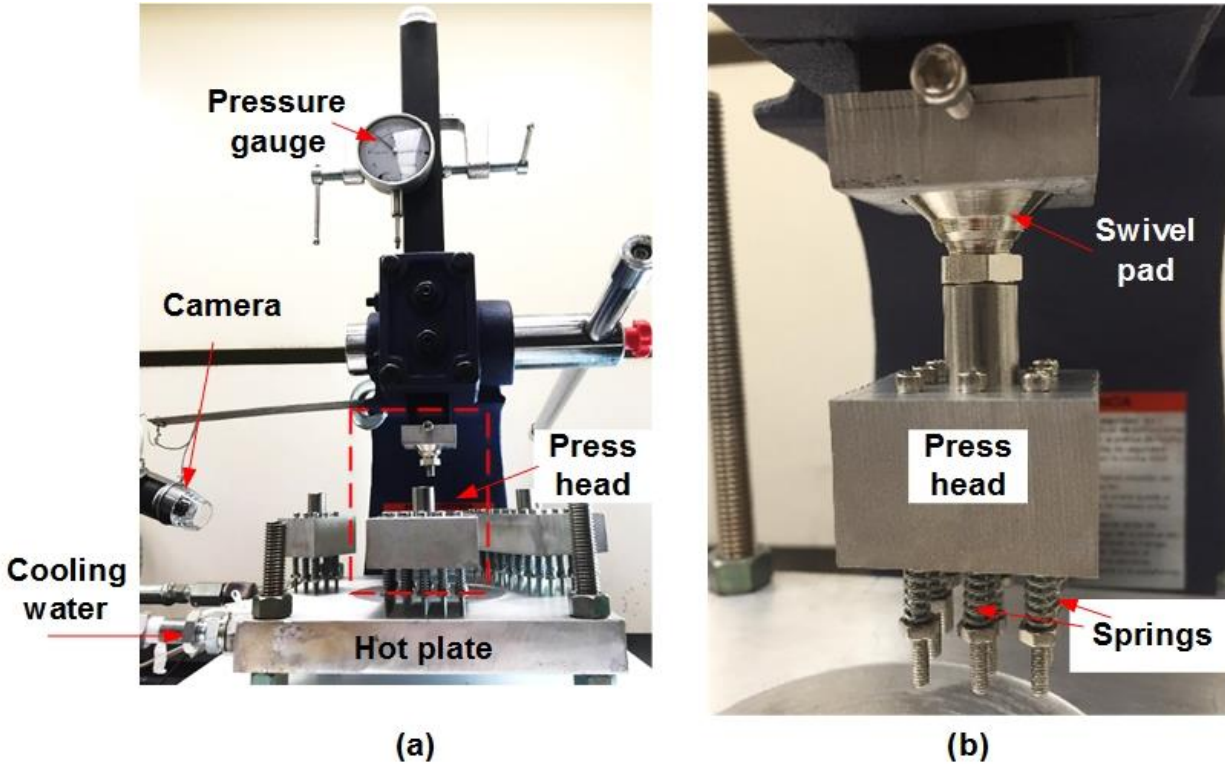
Customized hot embossing machine for fabricating semi-active Teflon SHPo surfaces.
